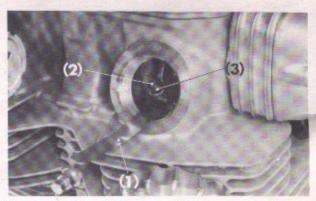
(1) Feeler gauge (2) Tappet adjusting screw (3) Lock nut
